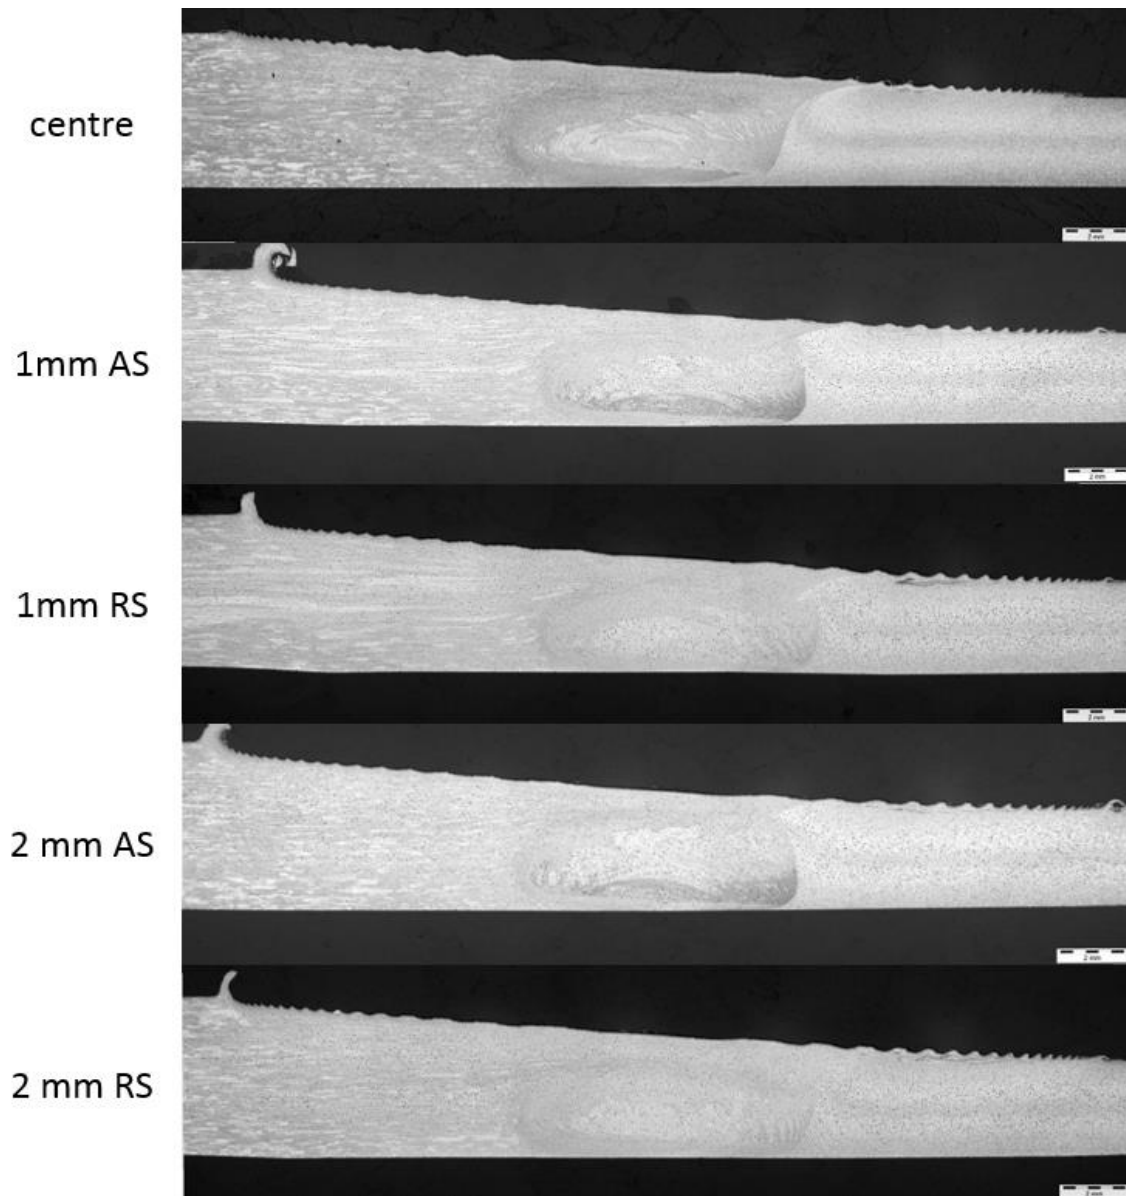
Cross section macrographs of the welds with different alignments (Courtesy of TWI,Ltd).
